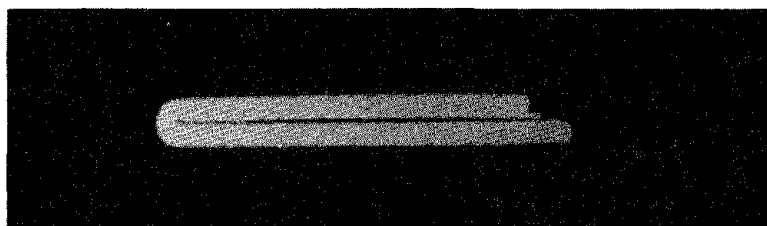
Typical specimen after bend testing. Specimen is 304SS.010/1018. The stainless steel is on the inside of the bend (X 28).
